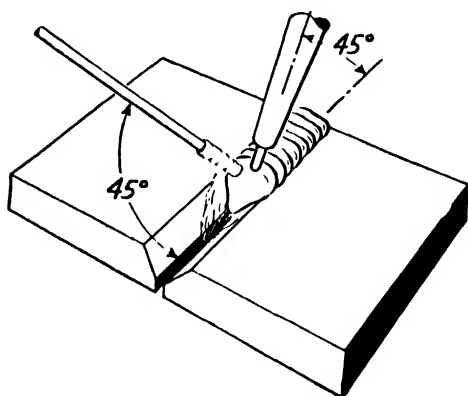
Braze welding. Keep the welding rod in the outer envelope of the flame, dipping it at intervals into the puddle to add metal. Keep the joint tinned just ahead of the flame.
